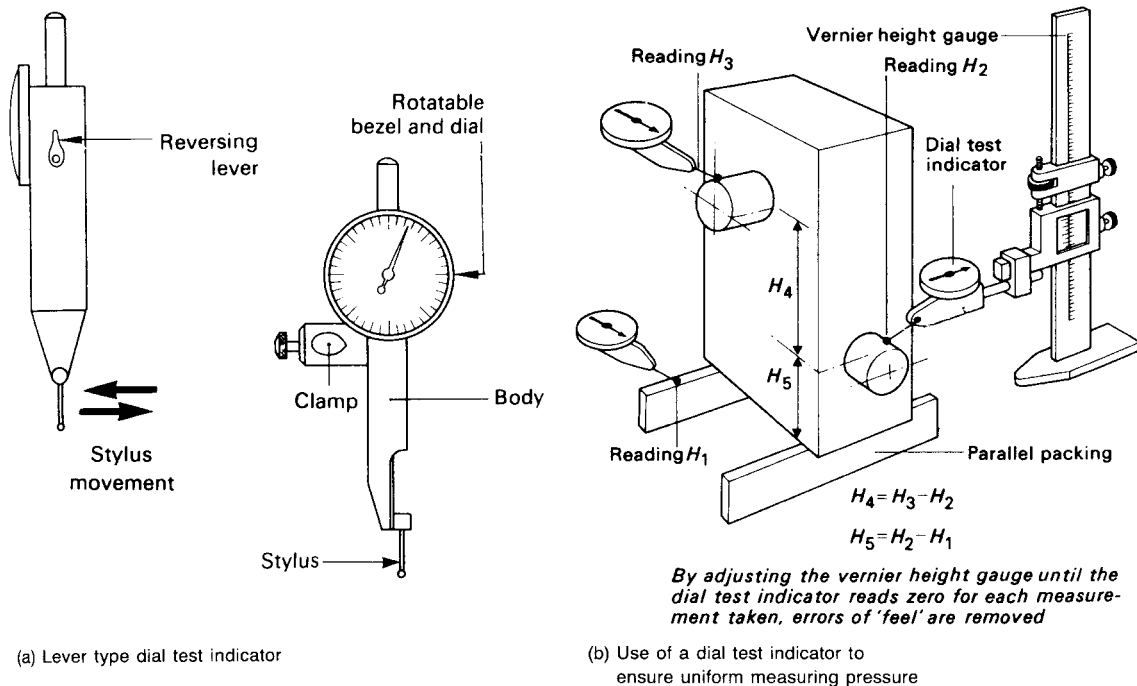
Dial test indicator (DTI): (a) lever type; (b) use of a DTI to ensure uniform measuring pressure – by adjusting the vernier height gauge until the dial test indicator reads zero for each measurement taken, errors of ‘feel’ are removed
